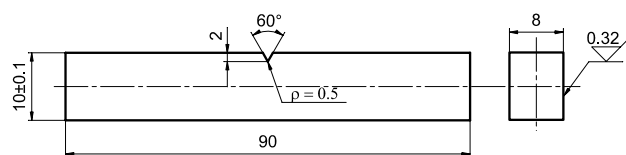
Specimen for tests of fatigue crack extension.
